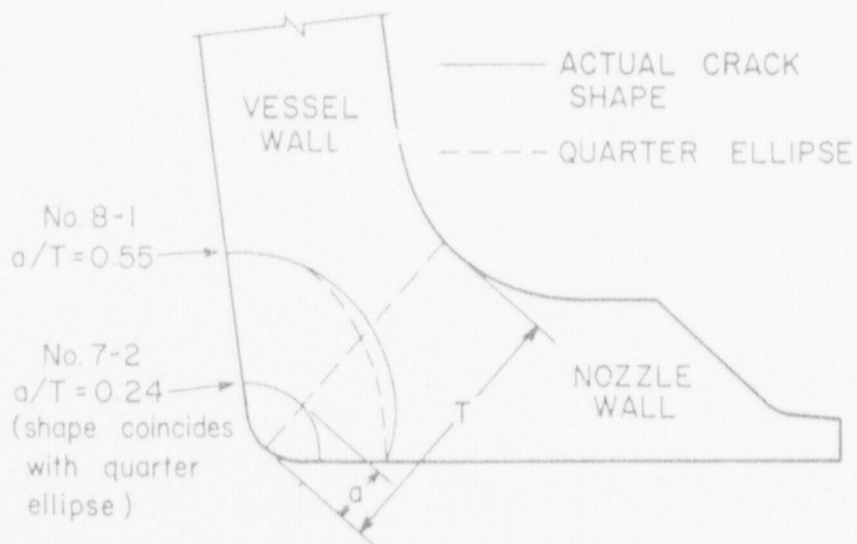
Flaw shapes for type C cracks in a nozzle corner.
